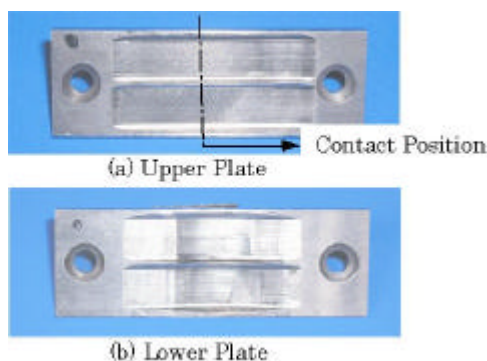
, Wearing Surface of Plates after 250 hr Operating (Power Piston)
